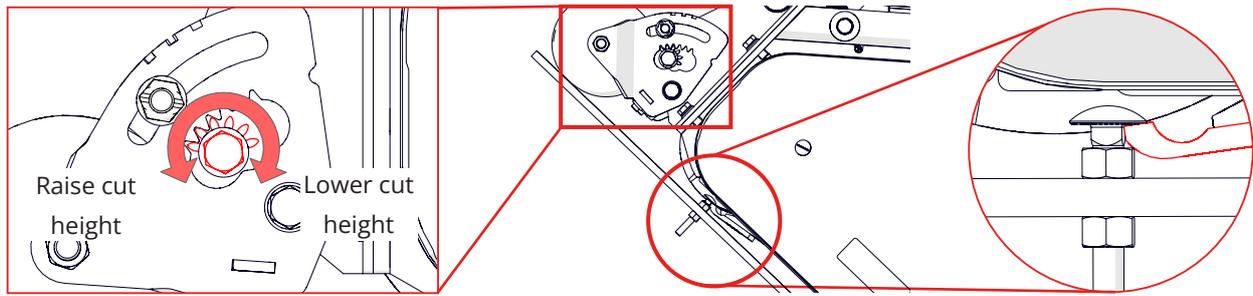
E - Rotate the toothed gear while offering up the setting bar. Stop when the head rests level/within the shear blade
